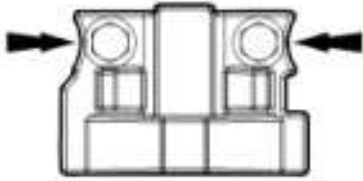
Identifying Valve Spring Compressor (303-1039)
